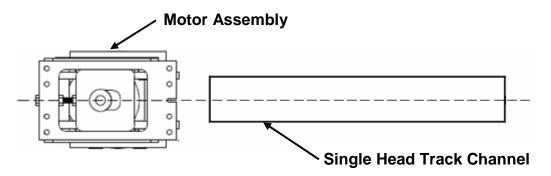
Motor Assembly Aligned with Single Head Track Channel
